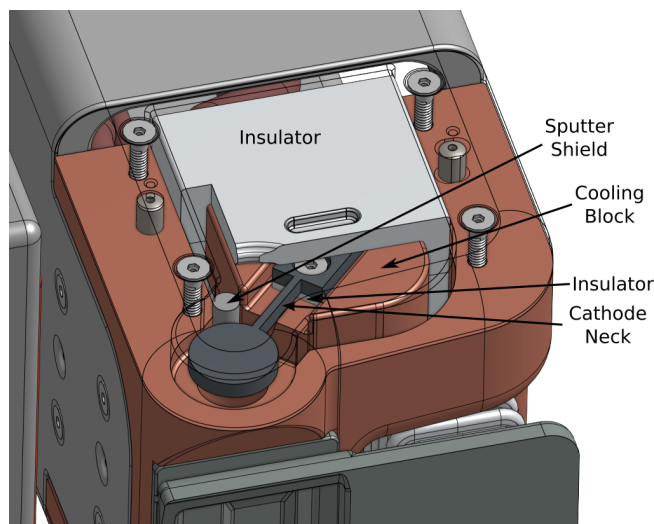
CAD view of cathode design. Cathode is made of tantalum, and screwed to a cooled copper block with screws. A thin thermal insulator piece is between the copper block and tantalum for extra insulation. This cooling block is separated from the anode housing by an electrical insulator. This insulator is cut-out to prevent sputtered tantalum from coating it. A sputter shield is placed on one side.
